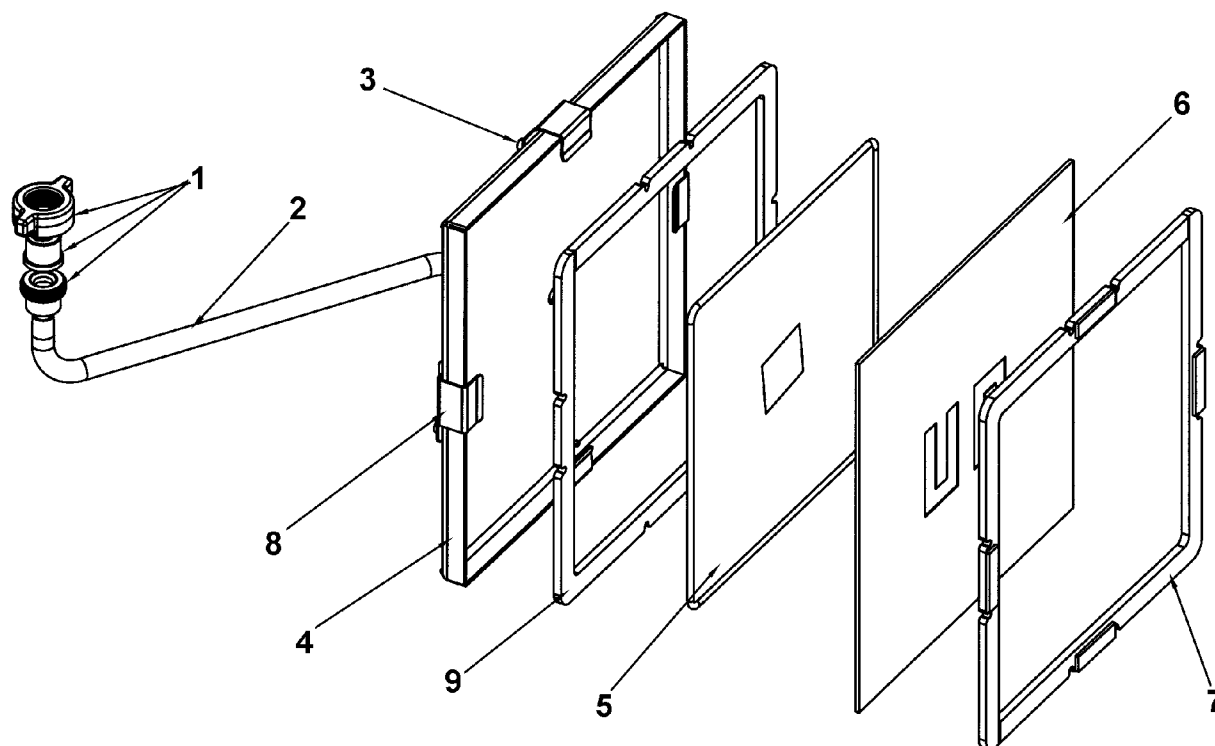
Supersorb Filter Assembly - Before 3-1-02
